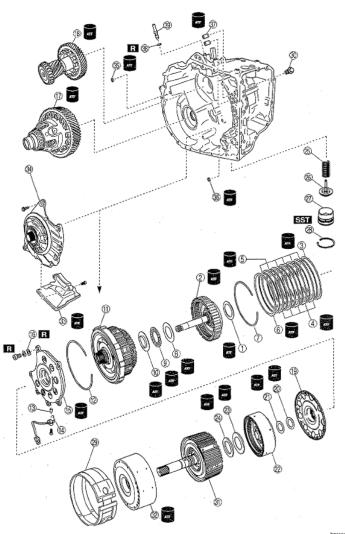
Identifying Automatic Transaxle Assembly - Components (1 Of 4) Courtesy of MAZDA MOTORS CORP.
